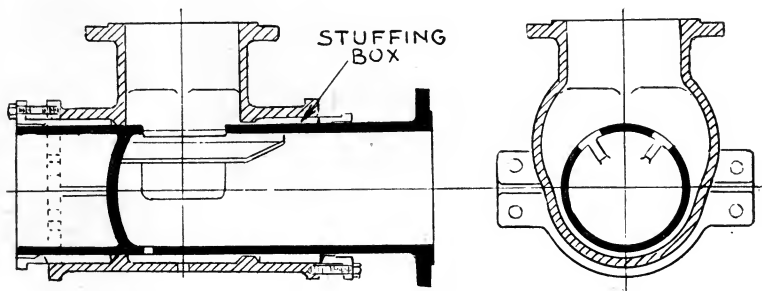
,000 and 5,001.—Ordinary expansion joint. *It consists of a recessed portion on one part of the joint into which the other fits, the enlarged part forming a stuffing box. The tie rods connecting the two flanges prevent the steam pressure forcing the two ends apart especially if it contain a bend or elbow.
